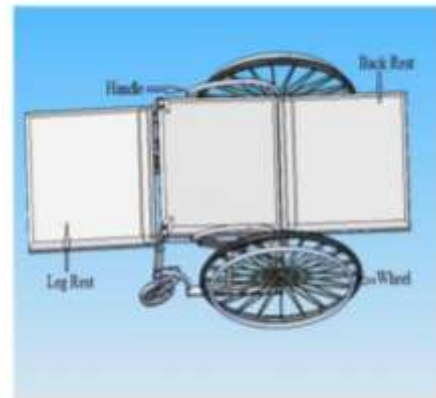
CAD Model of Wheel Chair Convertible to Bed
